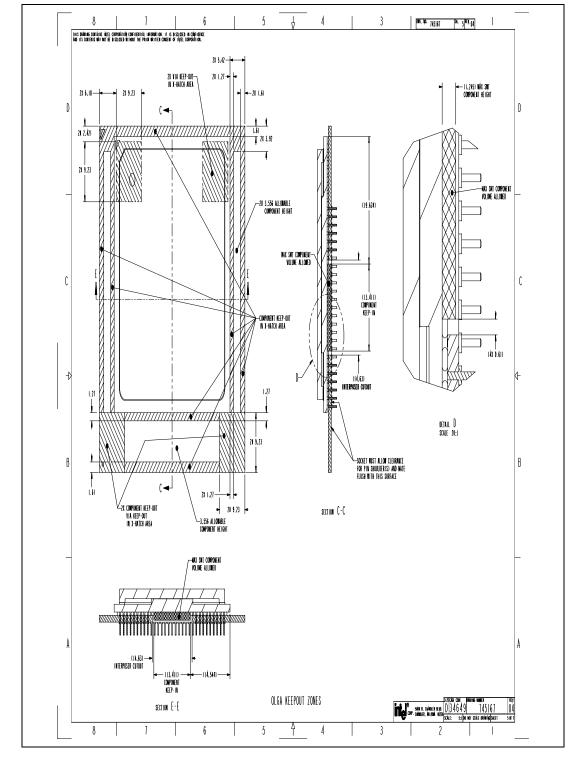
603-Pin Interposer Assembly Drawing (Sheet 5 of 7)
